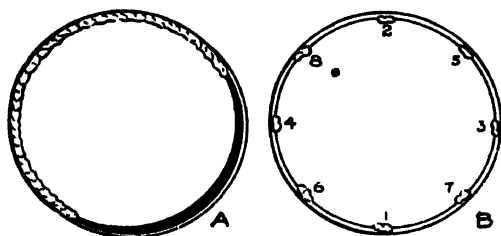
Distortion in welding an end to a cylinder, with the remedy.
